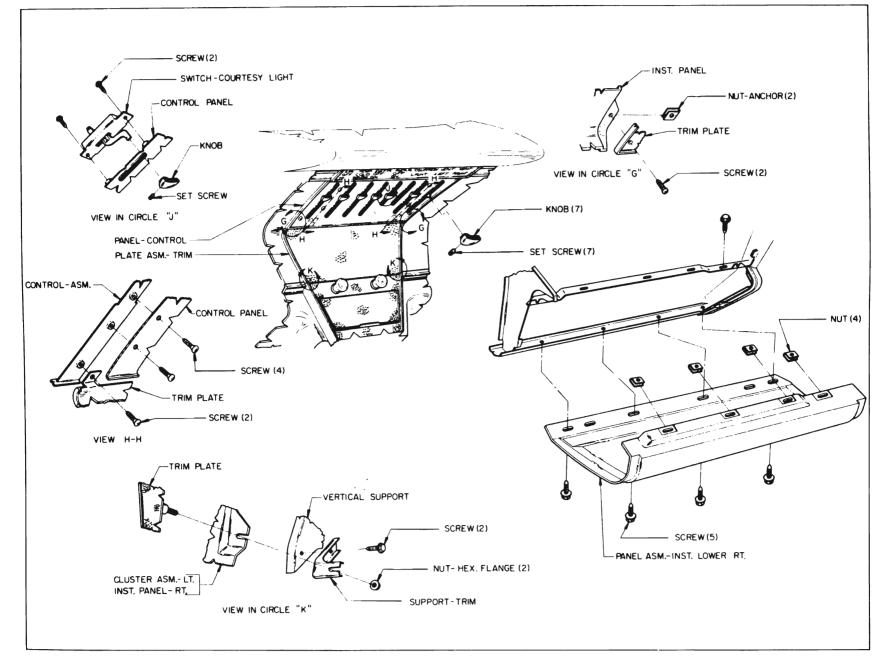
Control Panel and Right Lower Instrument Panel Installation—Riviera
